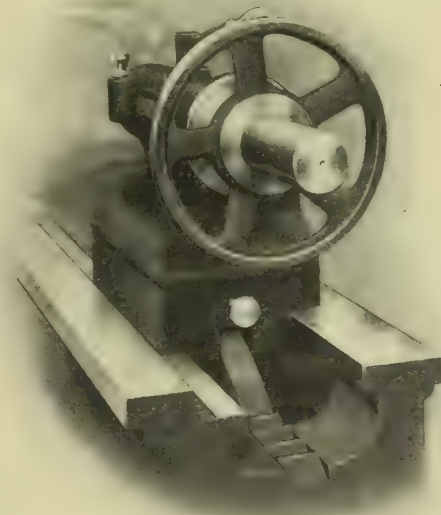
9IN. CENTRE "PARKSON" LATHE. TAILSTOCK WITH THRUST PANEL AND RACK.
